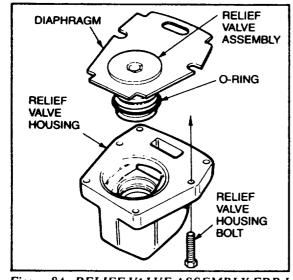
A. RELIEF VALVE ASSEMBLY FRP-I
